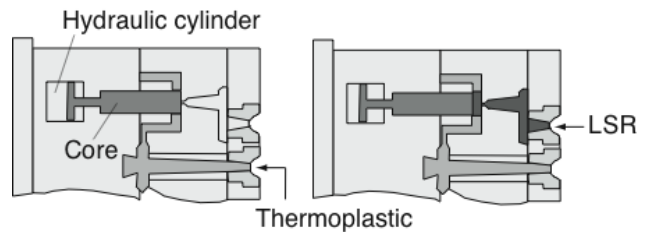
Schematic diagram of multi-component injection molding using a *core pull* or *core back* technique.
